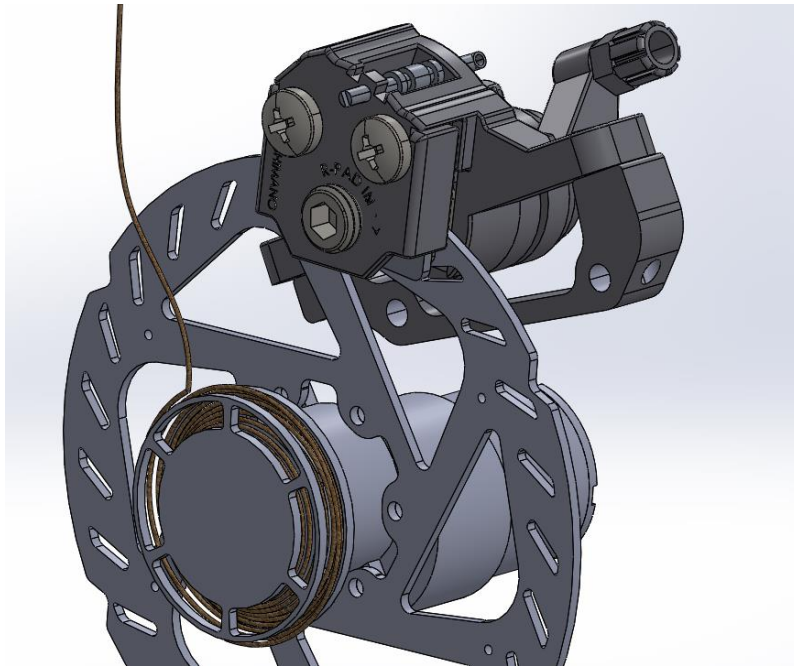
SolidWorks model of braking system showing third-party bicycle disc brake and rope/spool assembly.
